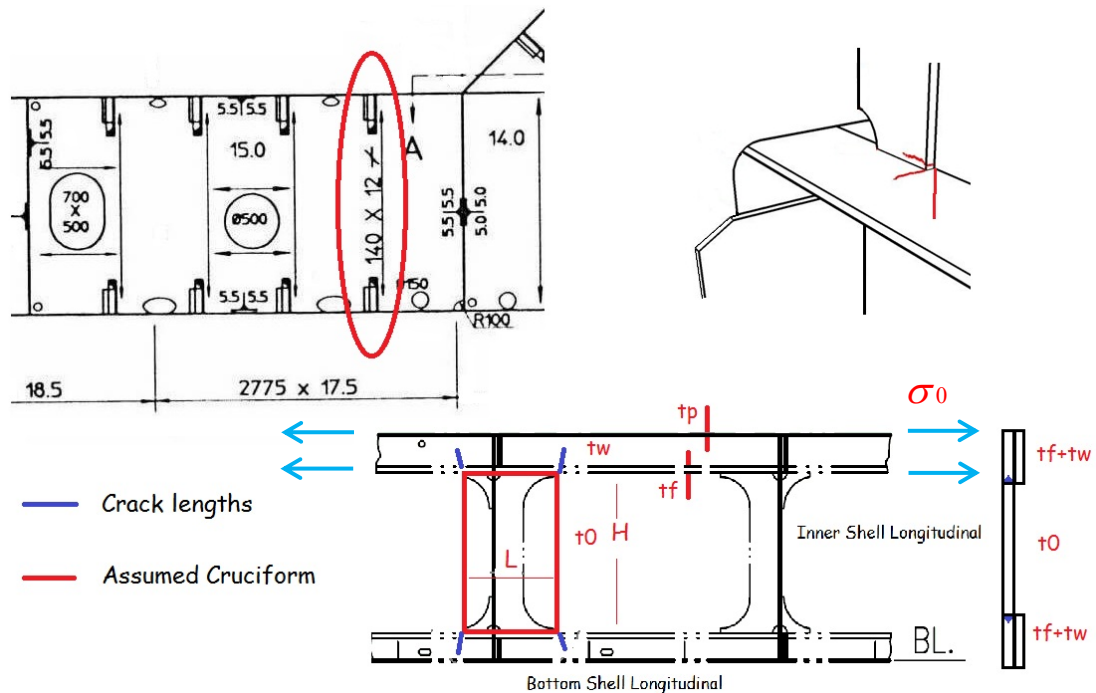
Situation I of cracks at bottom longitudinal frames
